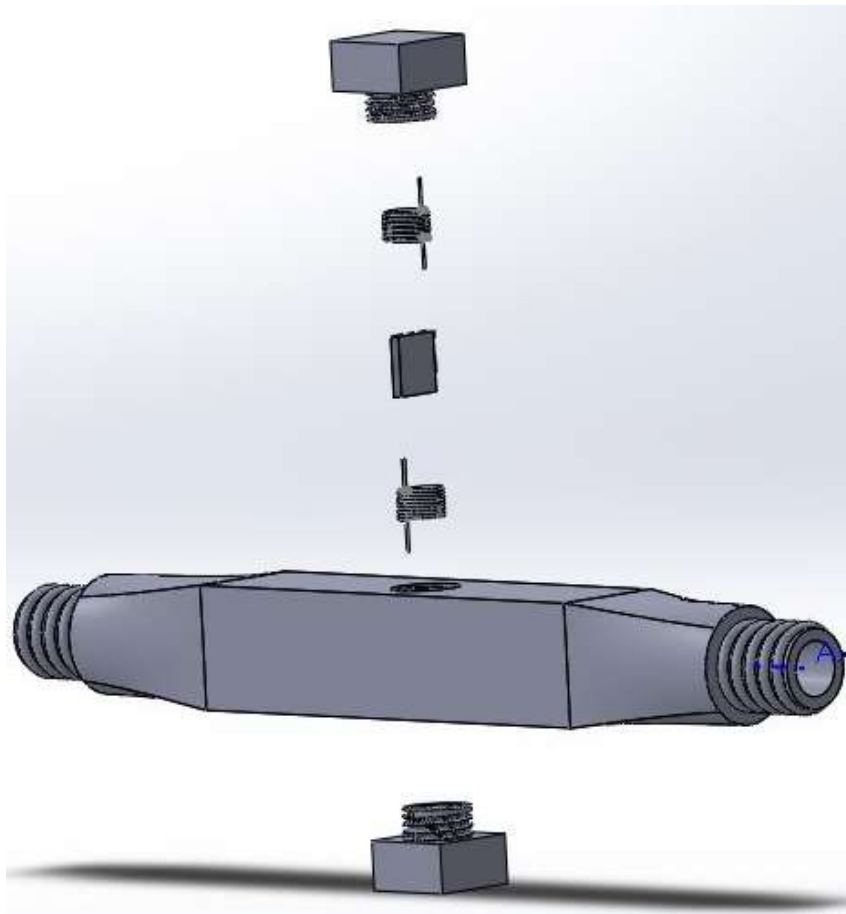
Future work: Torsion spring FCD design suggestion (b)
